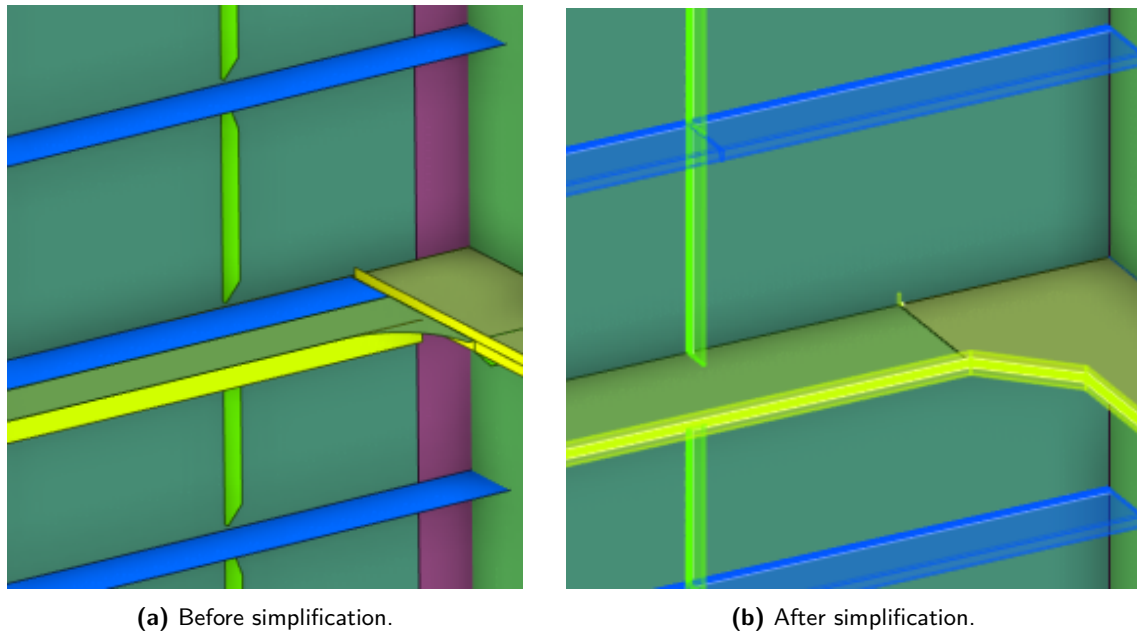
Simplification: extension of girders or stringers at a stiffener profile.
